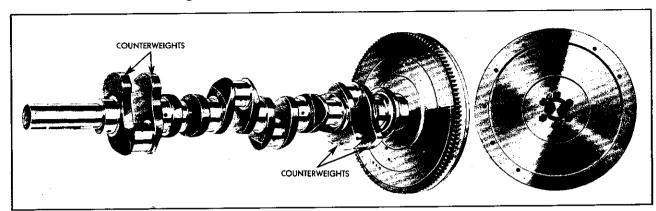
Six Cylinder Crankshaft and Flywheel.
